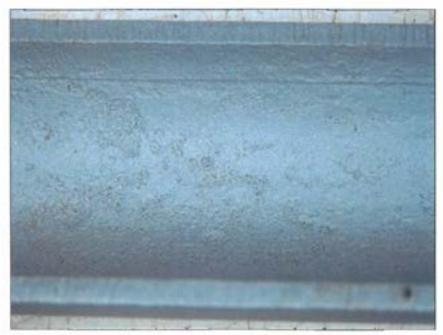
Corrosion damage on row 11 - tube 10 (bottom) after aluminum oxide blasting.
